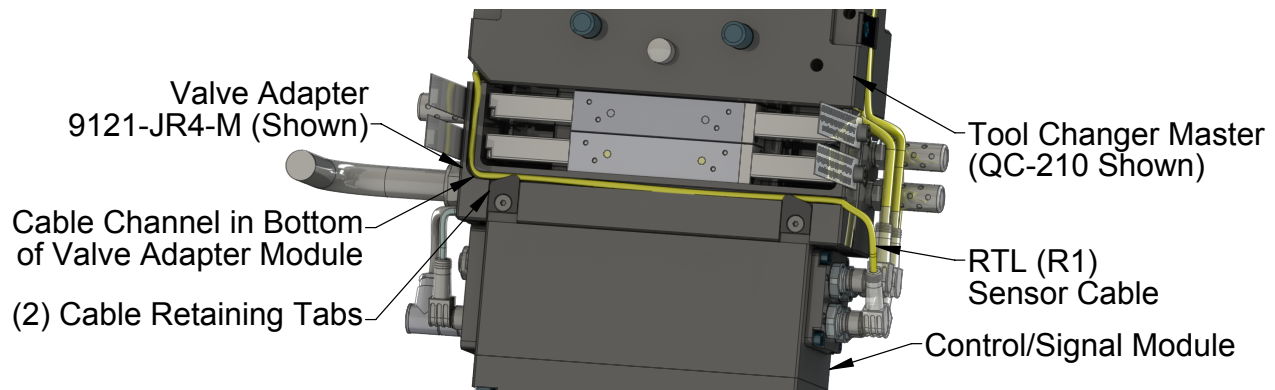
Valve Adapter Installation (QC-210 Shown)
